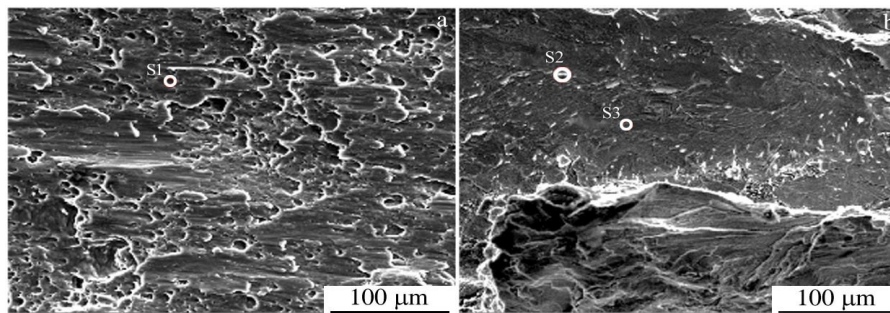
SEM fracture morphologies of 6061Al/QP980 steel joints after friction stir lap-welding with short (a) and long (b) probes
